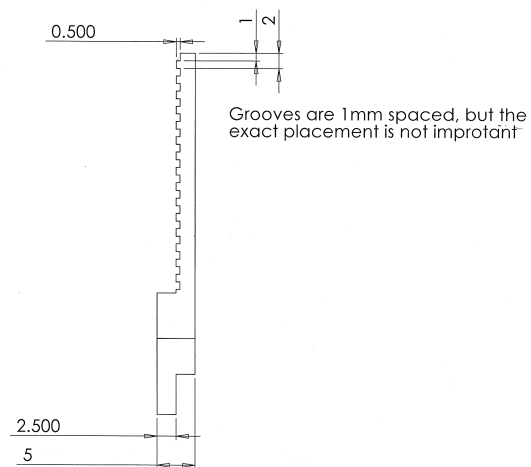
A SolidWorks drawing of the bottom chip rail bracket.
